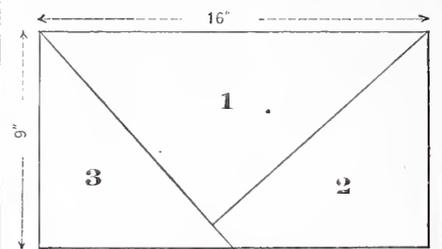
Y. A. M.'s Method of Cutting the Board.
